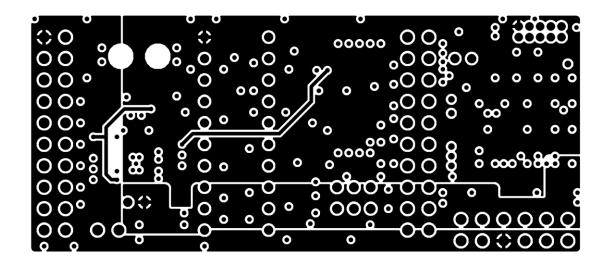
PCB Layout Inner Layer (Split PWR Plane)
